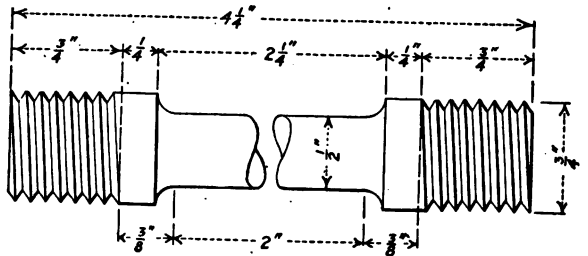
STANDARD FORM OF TEST SPECIMEN REQUIRED FOR ALL TENSION TESTS OF STEEL CASTING MATERIAL
